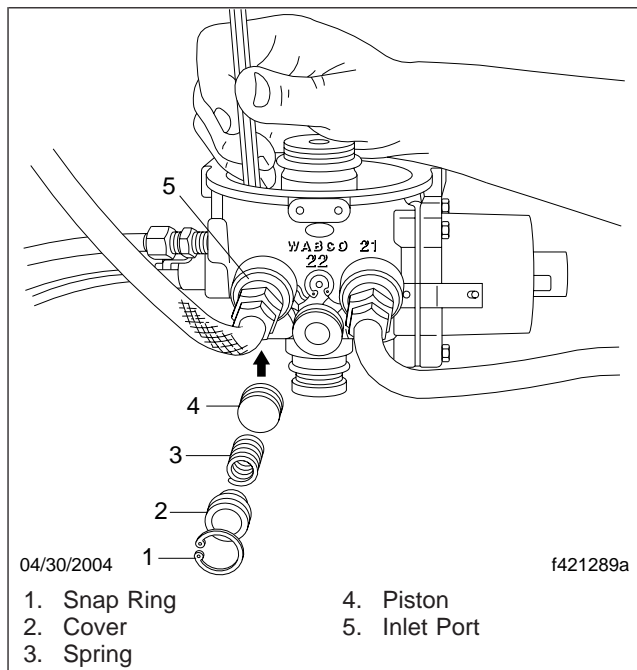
, Push the Piston, Spring, and Cover out of the Valve Cavity
